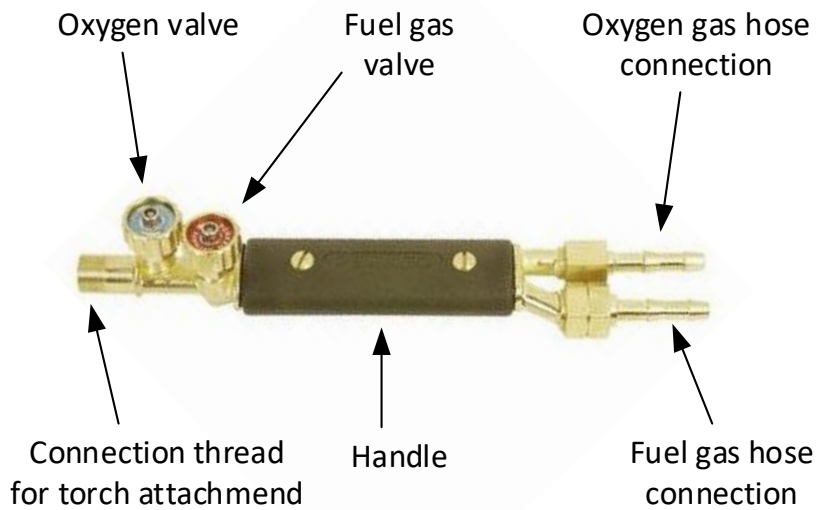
Brazing handle for acetylene or propane combustion gas (Source: HEAT GmbH)
